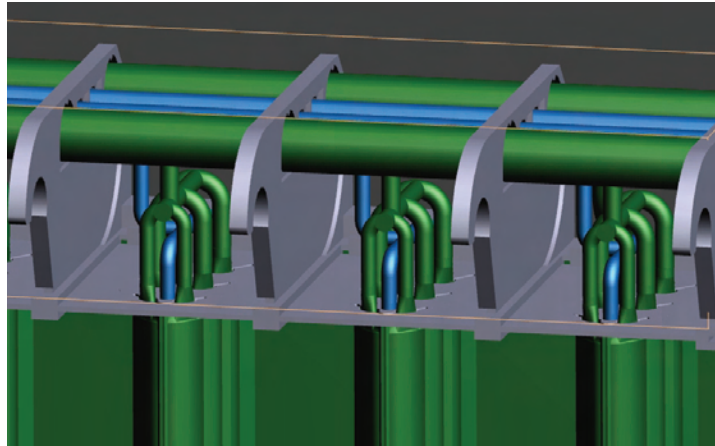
Upper manifold containing the supply of the cryopanel (blue) and the front shielding panels (green).
